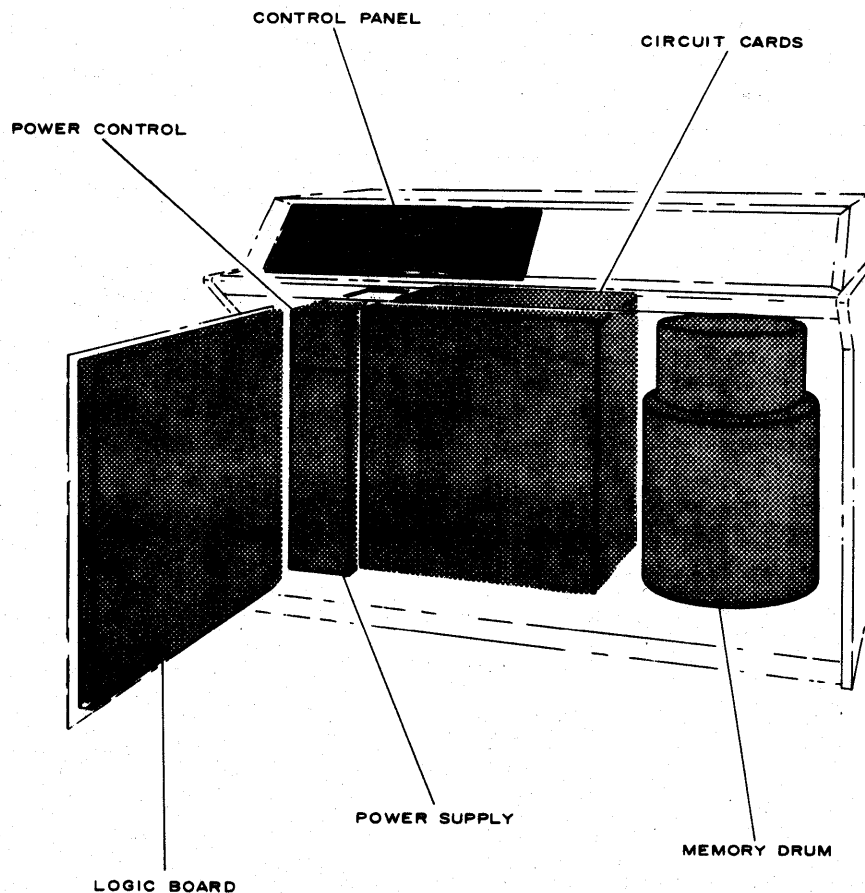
RPC 4010 COMPUTER ASSEMBLY
